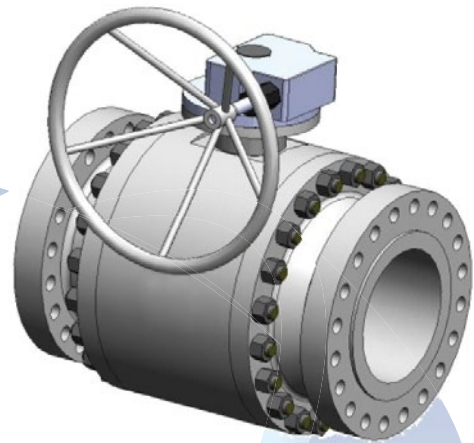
6000 Series Side Entry Ball Valve shown with Gear Operator
